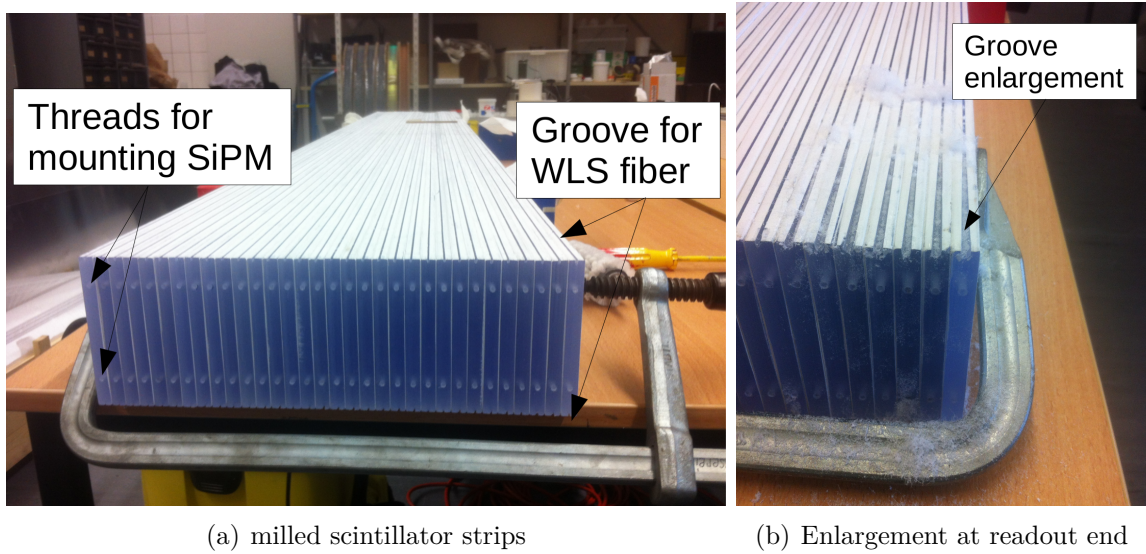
The readout end of the scintillator strips was milled and threads were drilled for the SiPM assembly later on (left). In order to fit the WLS fibers nicely in front of the SiPMs the groove as to be cleaned and enlarged at the readout end (right).
